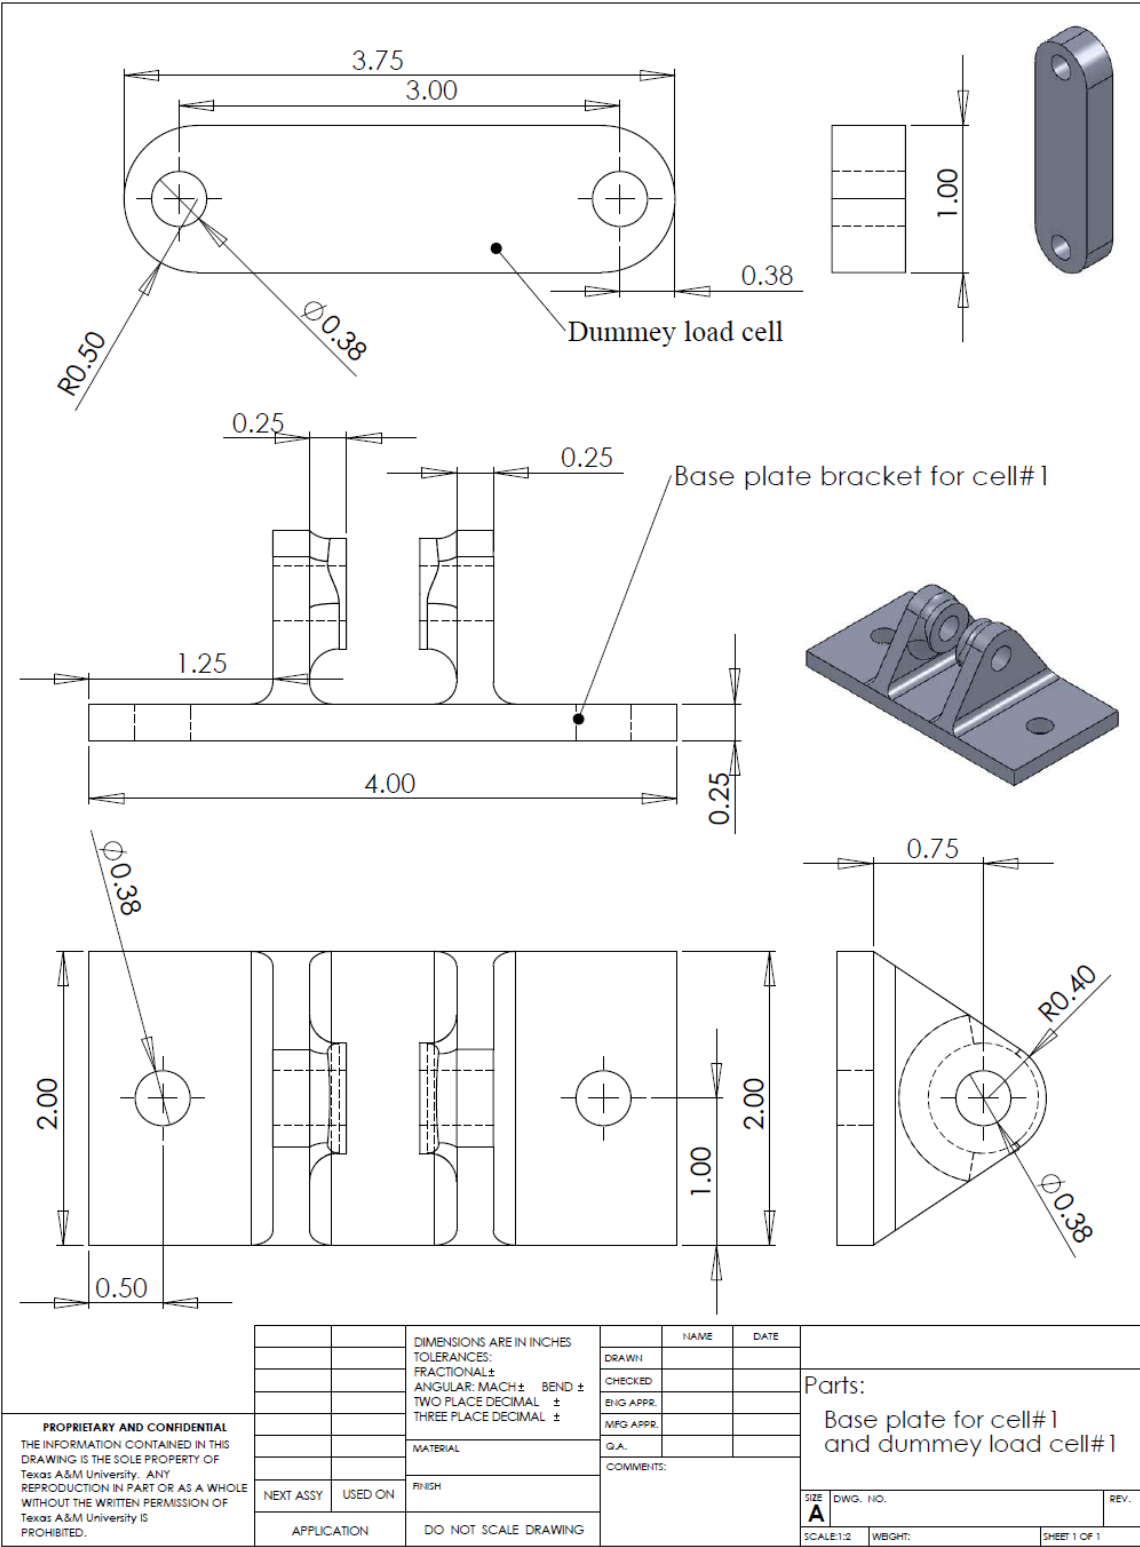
Dimensioned cell 1 dummy cell and redesign base plate bracket (dimension are inches)
